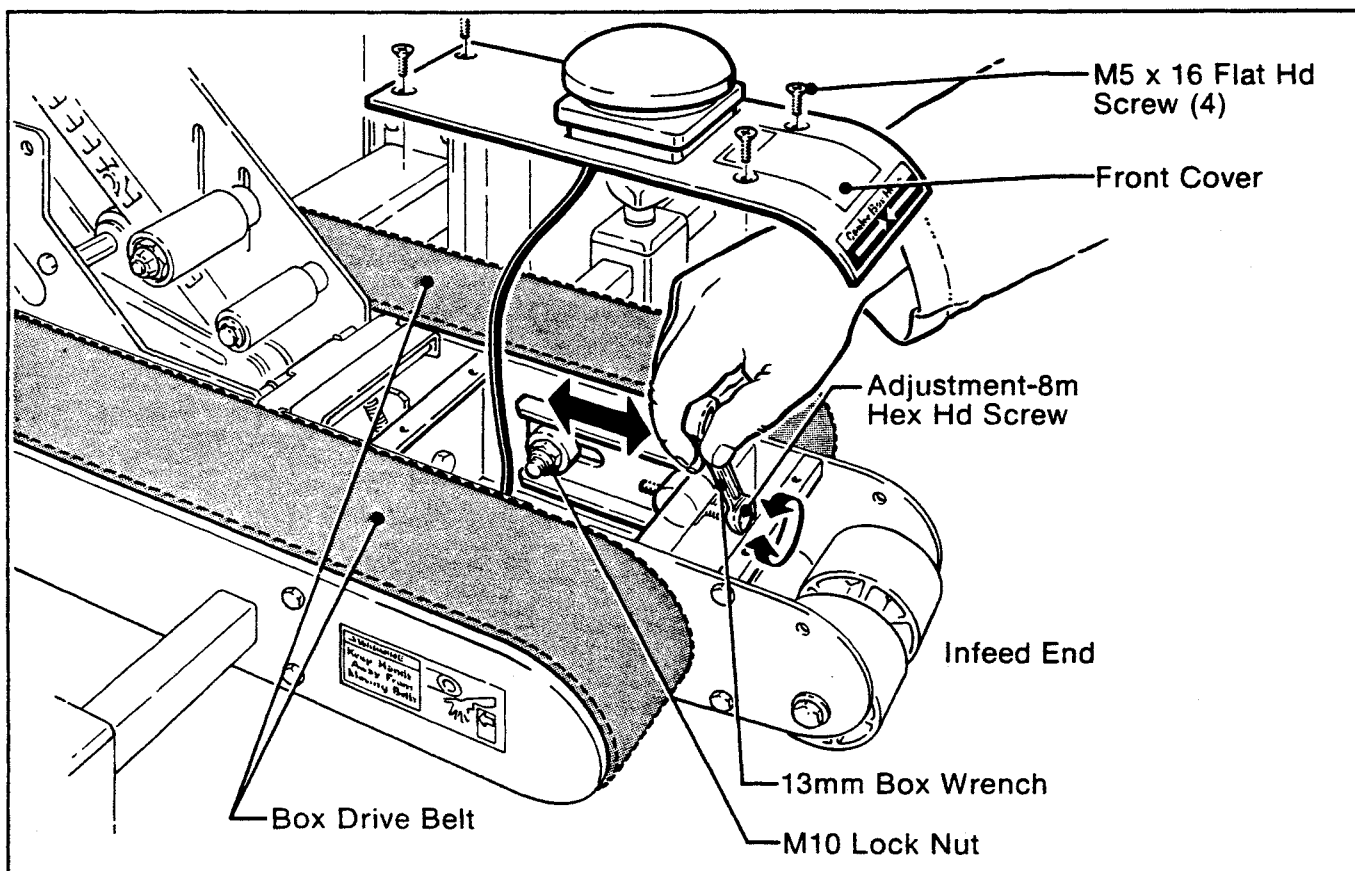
Box Drive Belt Tension Adjustment - Upper Drive Assembly
